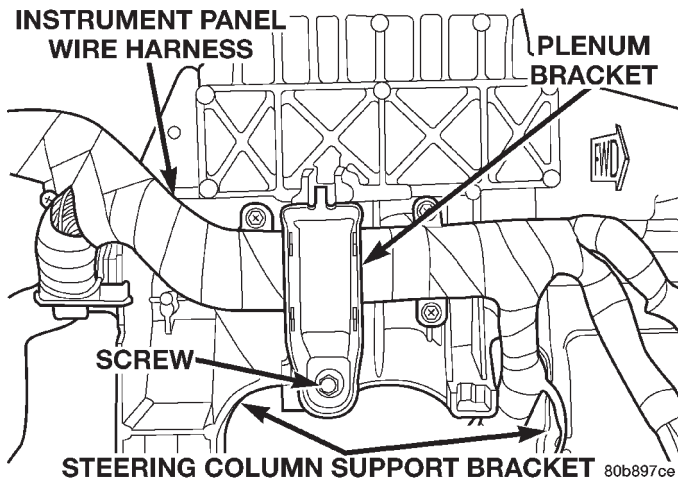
Instrument Panel Plenum Bracket Remove/Install
